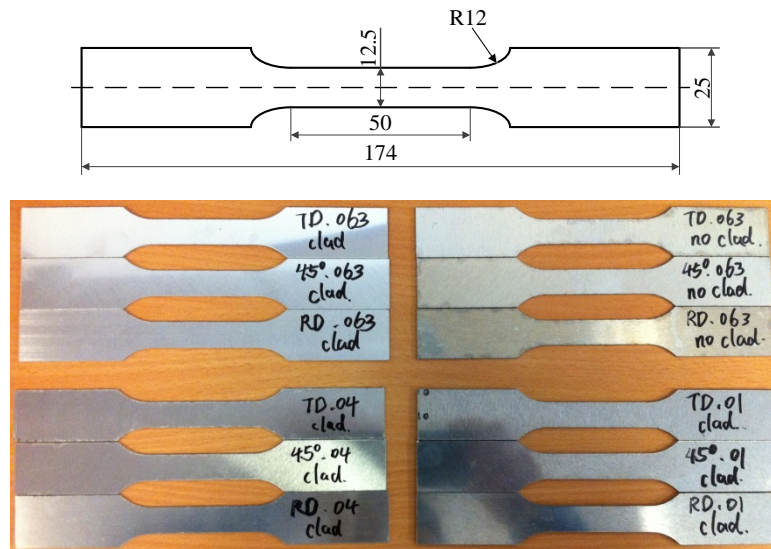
Specimen shape for uniaxial tensile tests (drawing unit: mm, thickness unit: inch).
